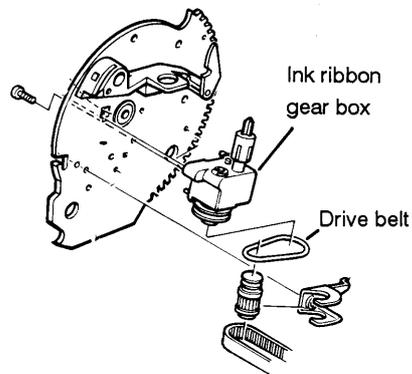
Removing the ink ribbon gear box. This figure is intended for parts identification only. No other parts need to be removed or loosened
